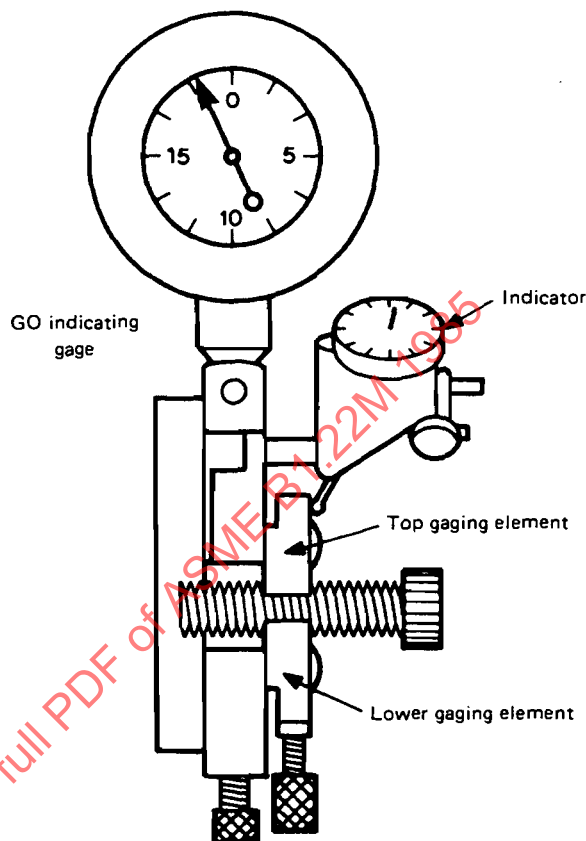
INDICATING GAGES — HELICAL PATH ATTACHMENT USED WITH GO TYPE INDICATING GAGE
